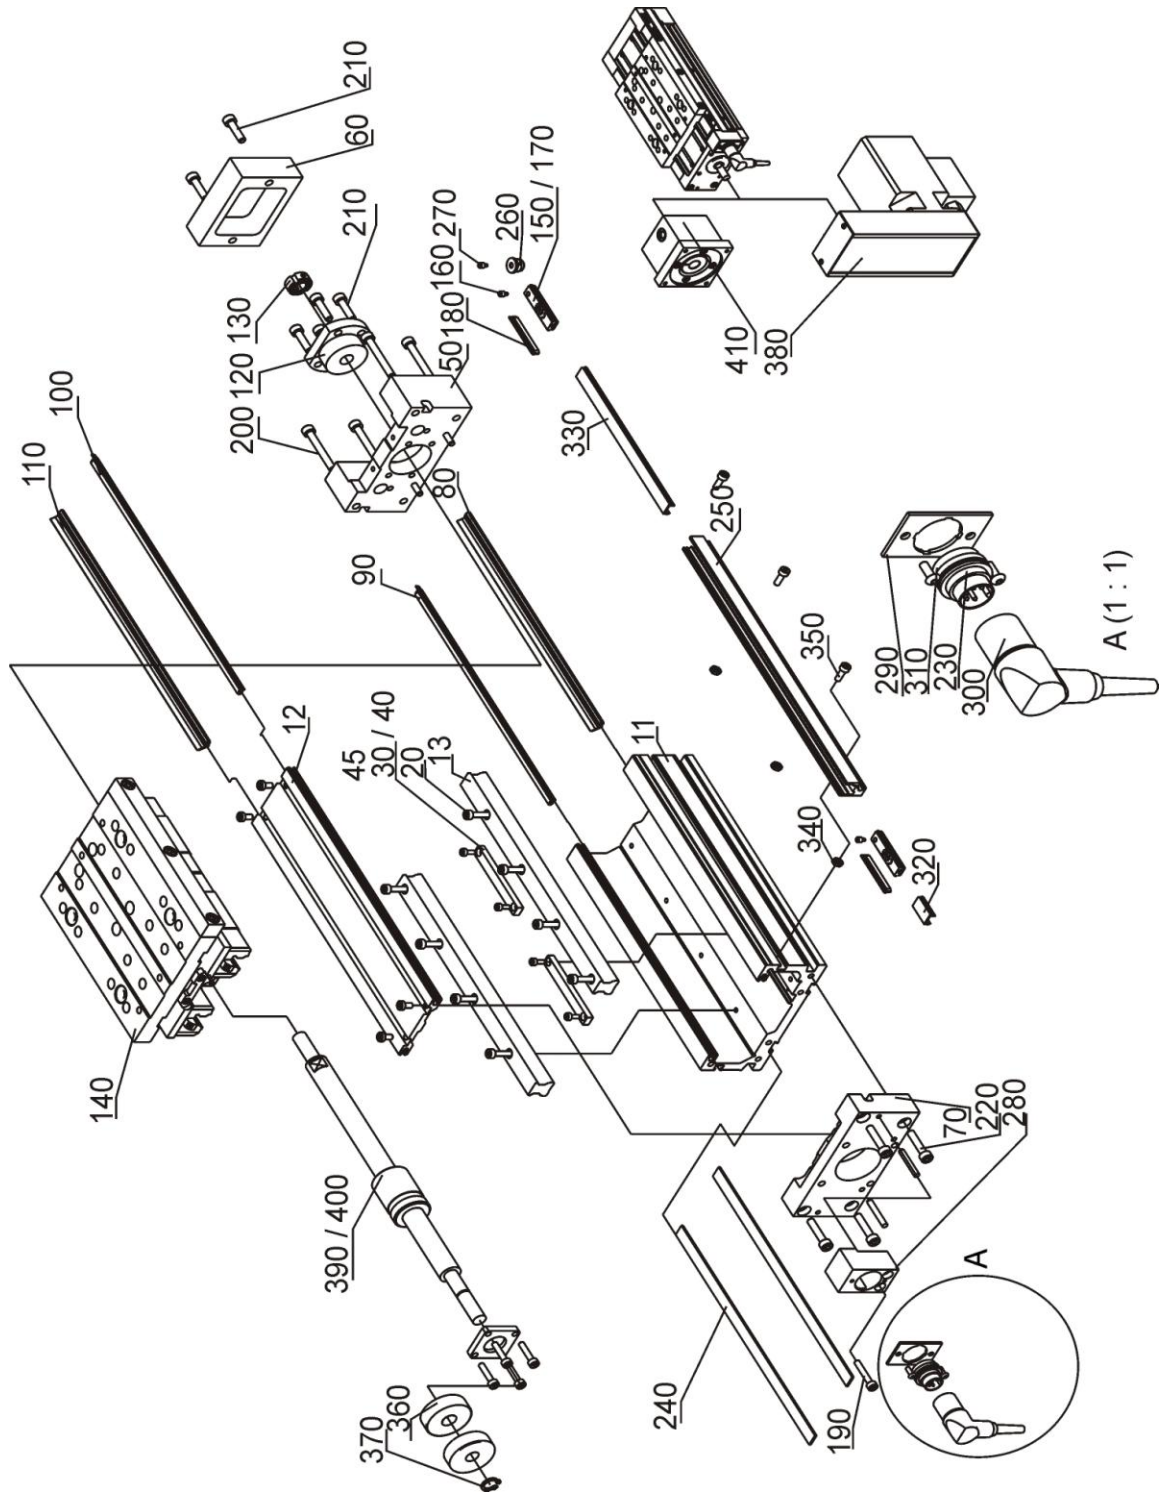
Basic unit profilLINE 115 (TG100604), exploded view
